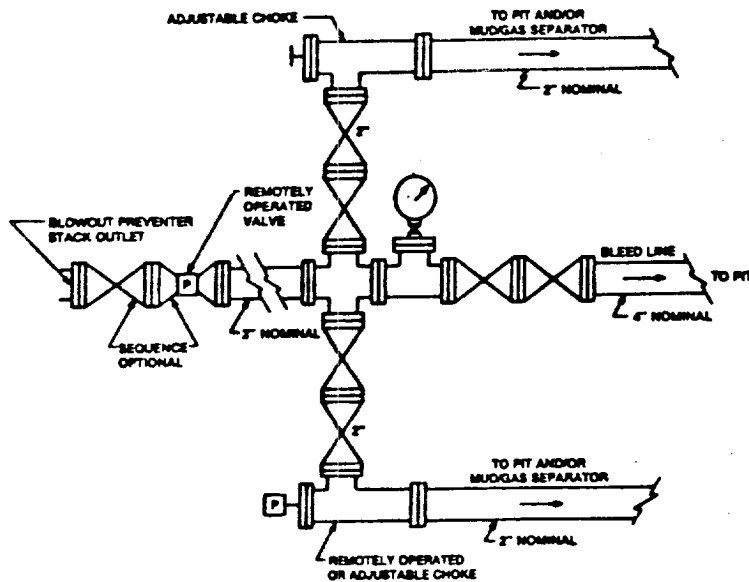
Typical choke manifold assembly for 5M rated working pressure service — surface installation.
